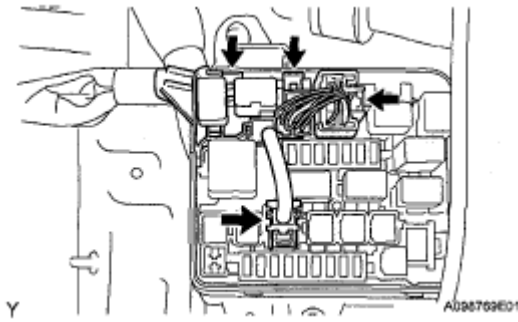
Identifying Engine Wire Harness With 2 Claws
